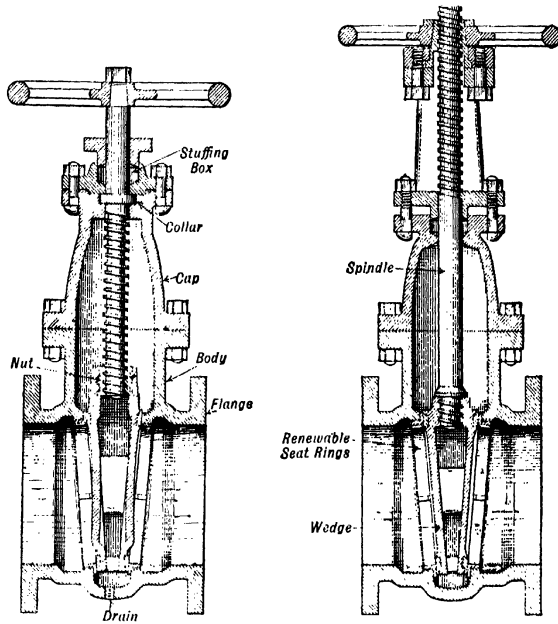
Non-rising and Rising Spindle Gate Valves with Iron Body and Brass Mountings.
